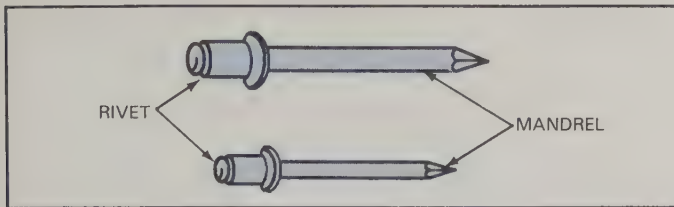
Blind rivets are used to permanently fasten pieces of sheet metal together. The fastener consists of the rivet itself and a mandrel that is snapped off after forming a rivet head.
